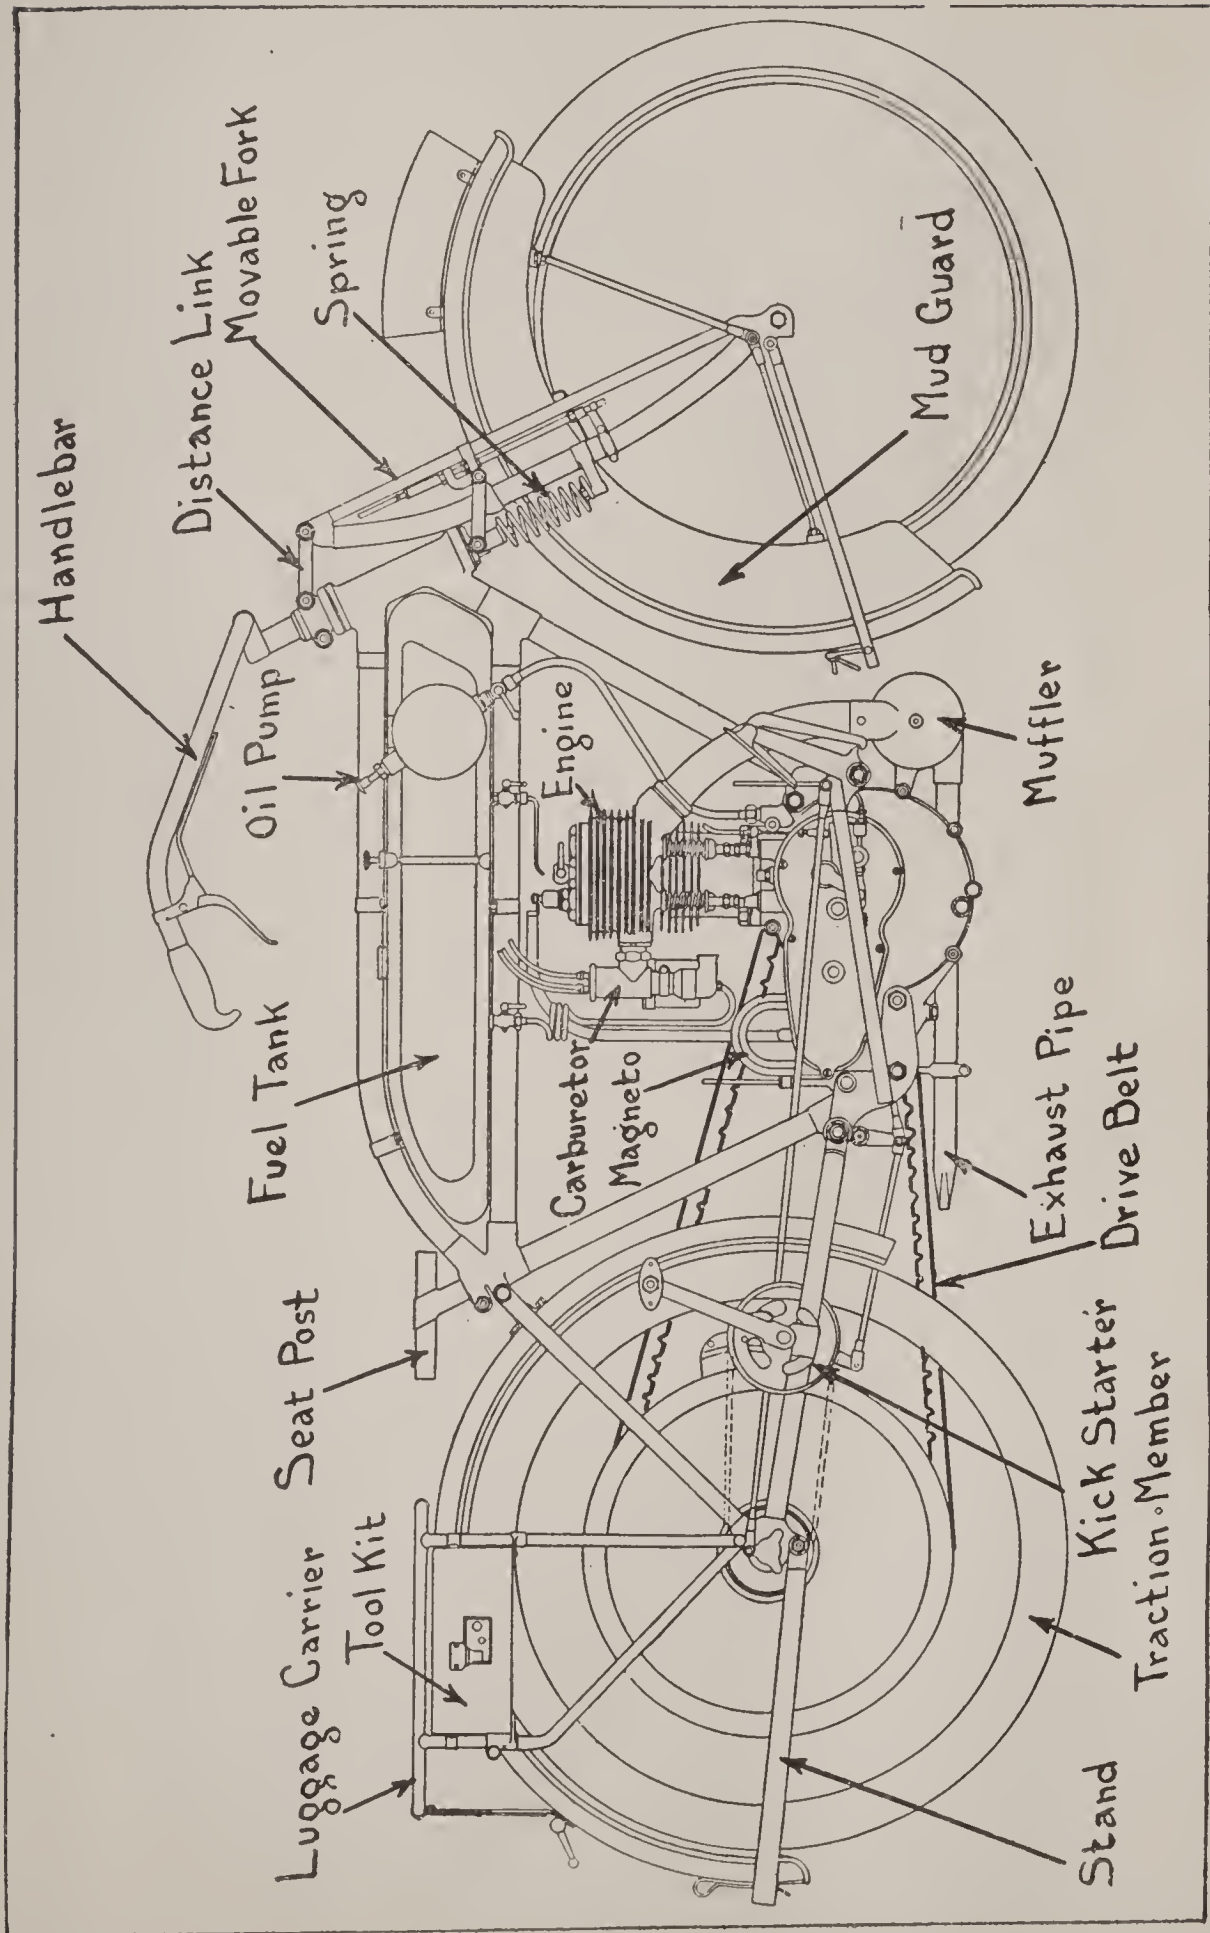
Side View of Single Cylinder Motorcycle of English Design With Important Parts Marked For Easy Identification.
